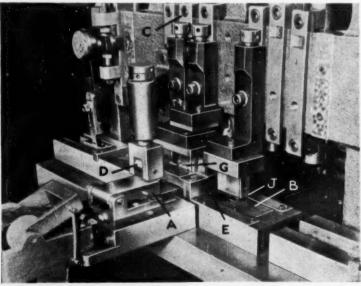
Close-up View of the Working Zone of the Press, Showing Tooling for the Components in Fig. 2 and 3
